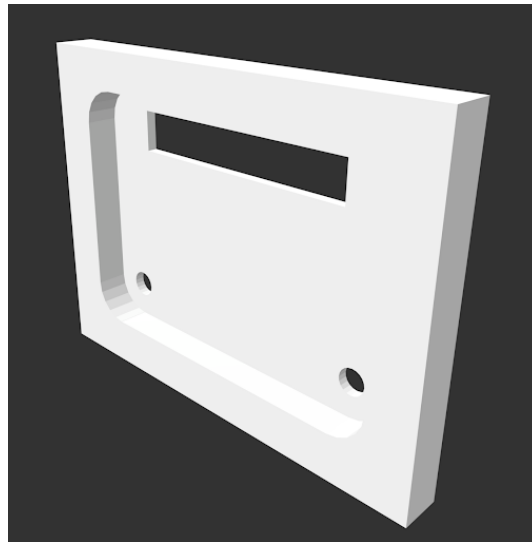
DPS310 carrier piece, manufactured using a 3D printer
